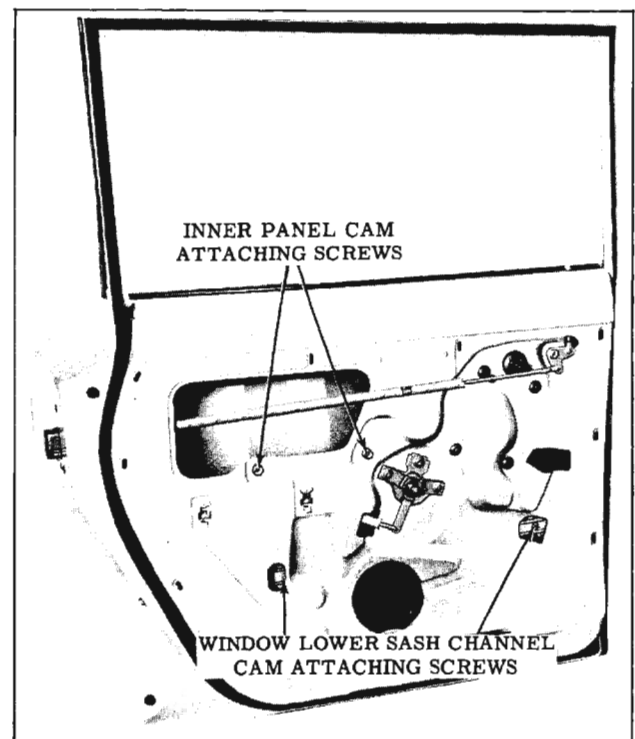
Inner Panel Cam and Window Lower Sash Channel Cam Attachment
